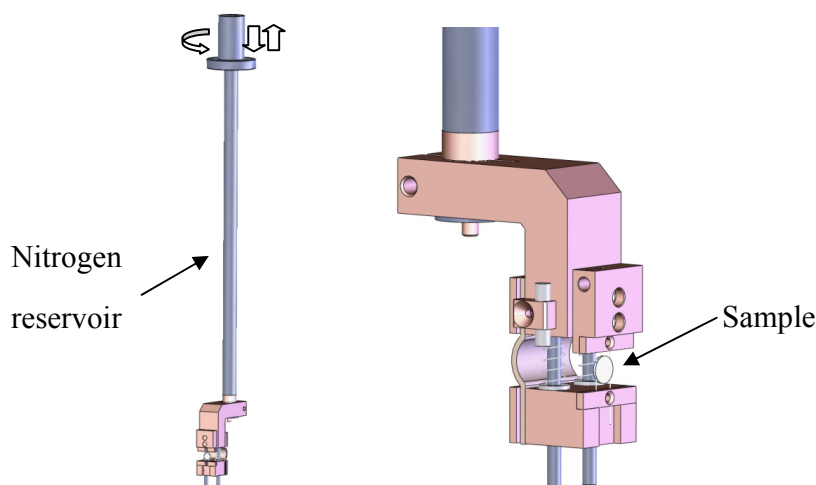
Drawing of the sample holder: whole body (left) and close view (right).
